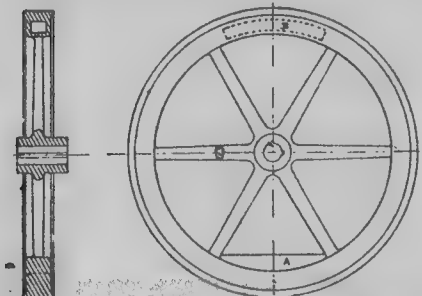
Fly-wheel Counterweighted or Cored to Secure Mechanical Balance.
